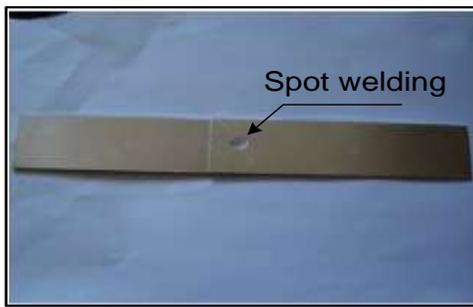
overlapping the two pieces of spot welding specimen.
